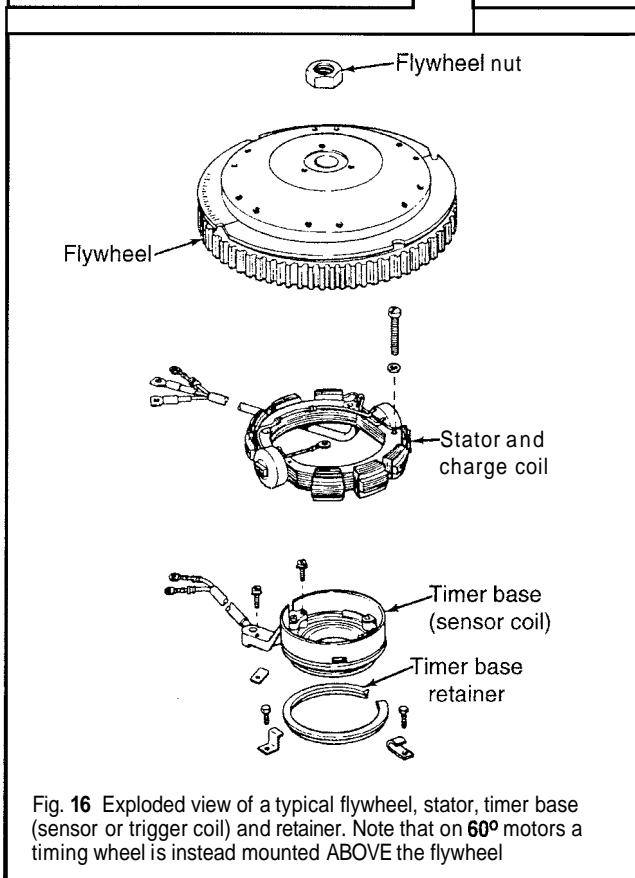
Exploded view of a typical flywheel, stator, timer base (sensor or trigger coil) and retainer. Note that on 60° motors a timing wheel is instead mounted ABOVE the flywheel
